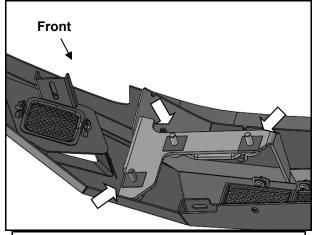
Remove double bolt plates from end of frame. Also remove single bolt plates from back of factory bumper (driver/left side end of frame pictured)
